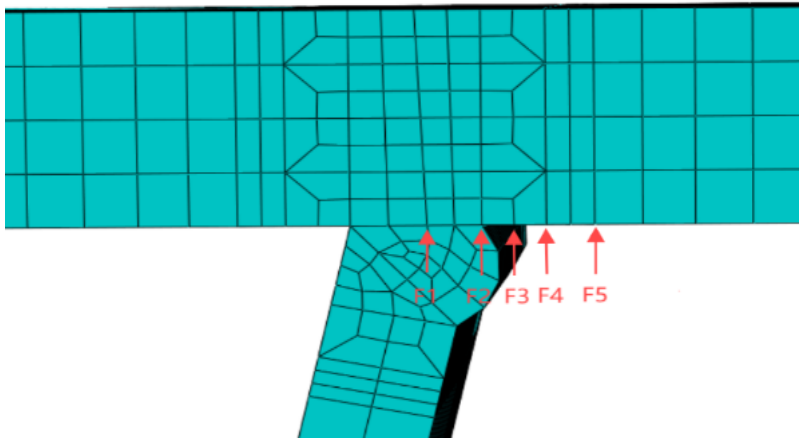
Arrangement of monitoring points perpendicular to the weld direction
